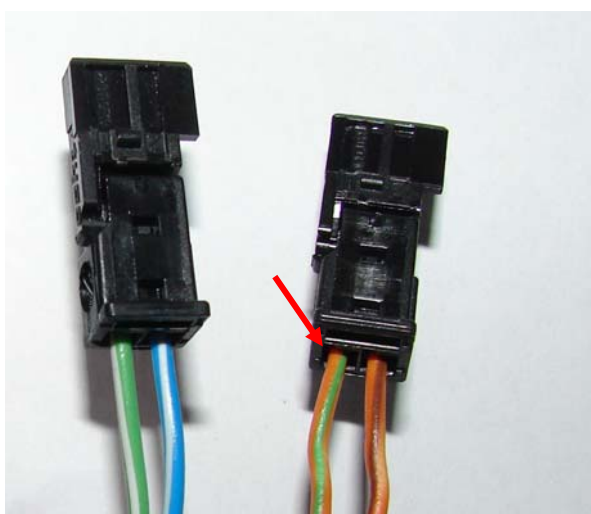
remove red cover of the connector, use e.g. a small screwdriver to unlock the cover. The locking stud must be pressed in the arrows direction.
